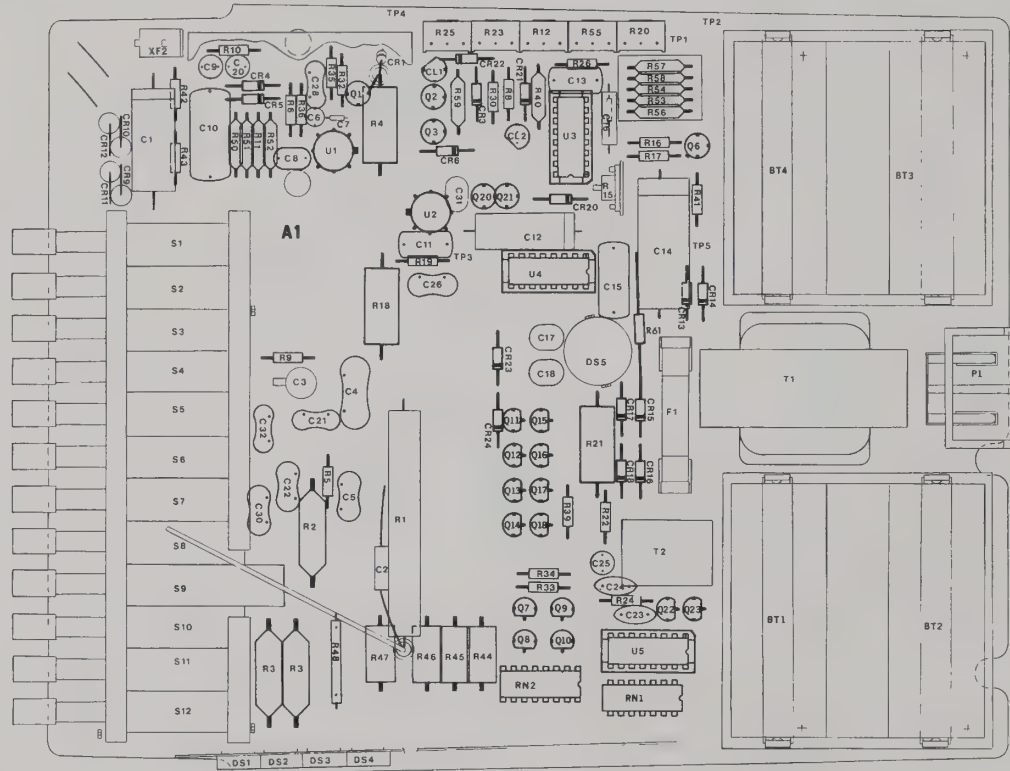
8000A-01 MAIN PCB ASSEMBLY
